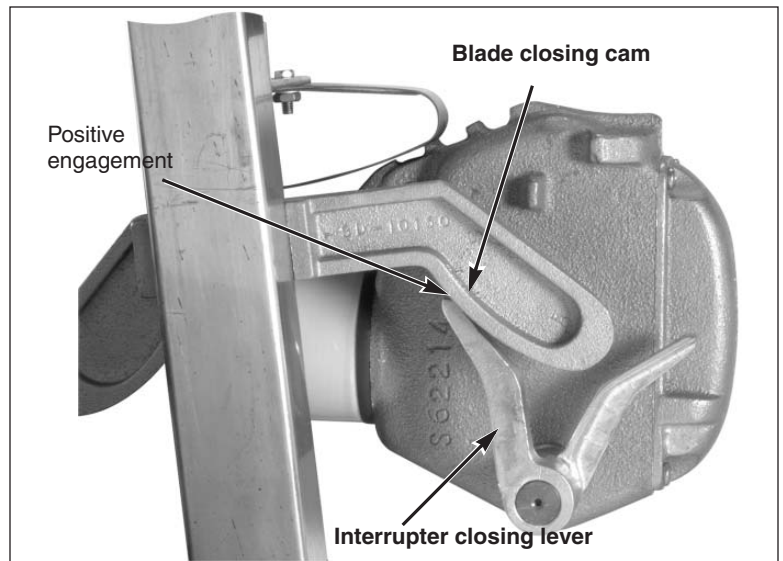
Verifying blade closing cam engages interrupter closing lever.
